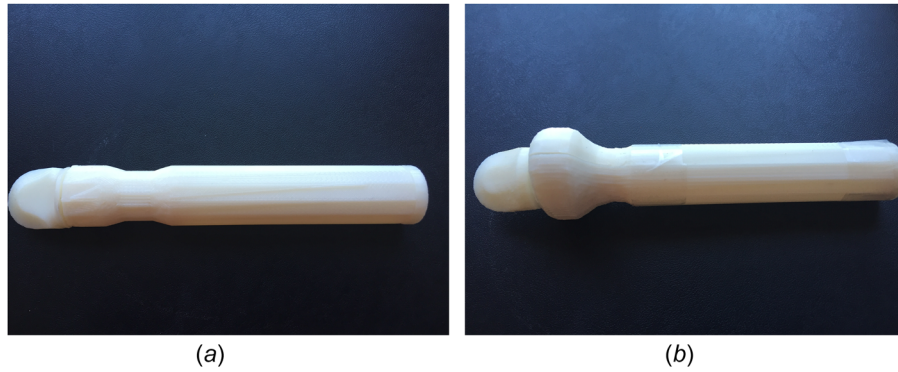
(a) Three-dimensional printed model of compression load cell device and (b) three-dimensional printed model of 3D load cell device
